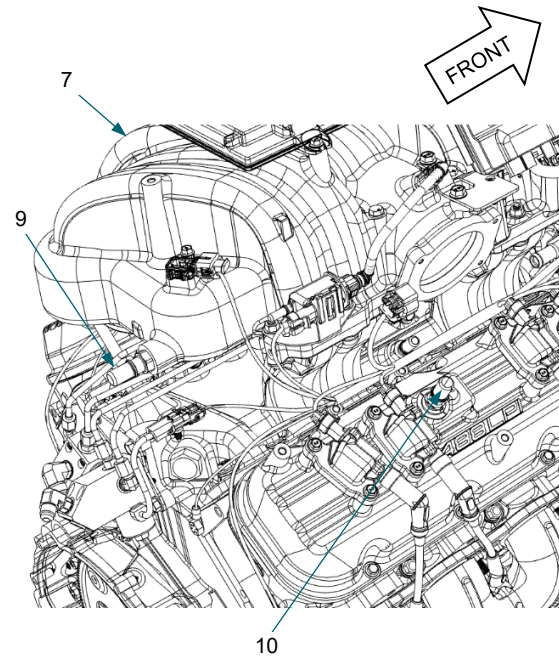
PCV line fitting (9), PCV valve (10), intake manifold (7).
